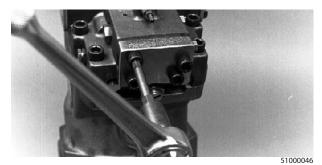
Remove Minimum Angle Servo Cover Screws
